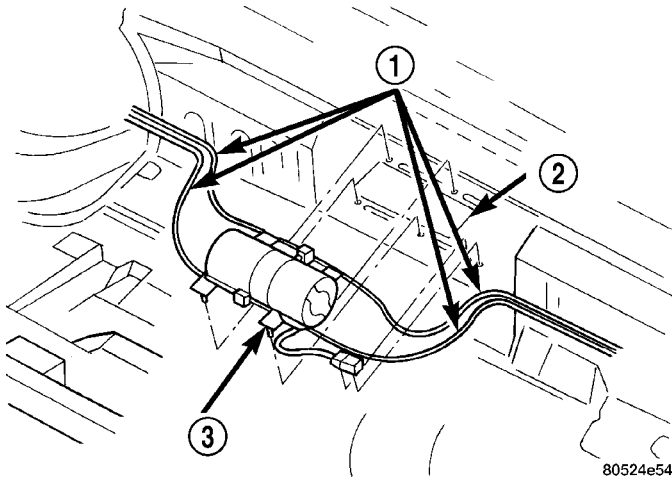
HYDRAULIC PUMP ASSEMBLY
